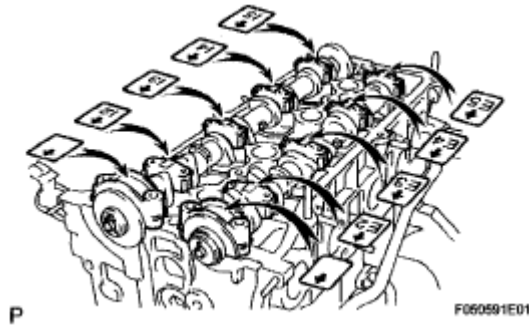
Inspecting Camshaft Bearing Caps
